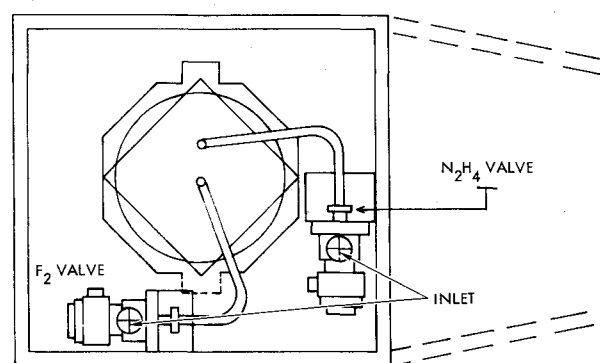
Thrust box with propellant valves mounted and lines to injector.
